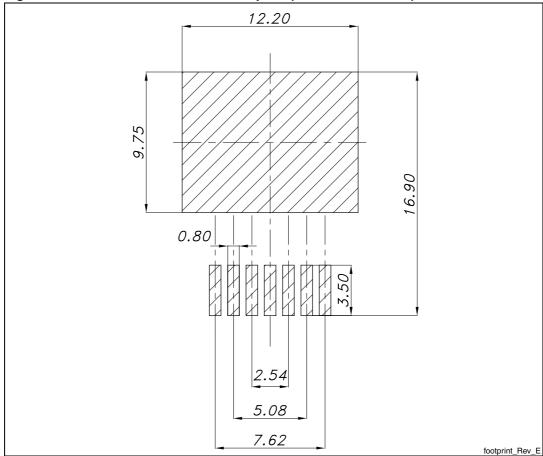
H²PAK-6 recommended footprint (dimensions in mm)
